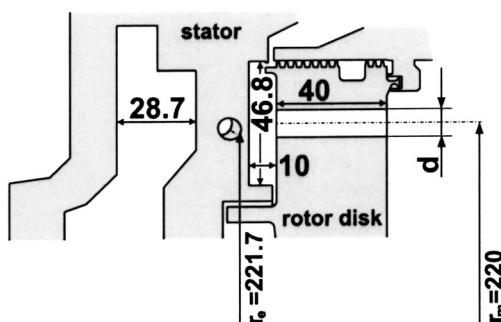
Details of preswirl chamber, (dimensions in mm)
